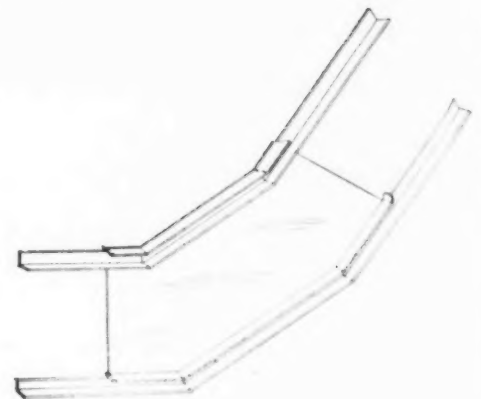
Redesigned "gooseneck" of arc welded parts. Weight 44½ lbs.
